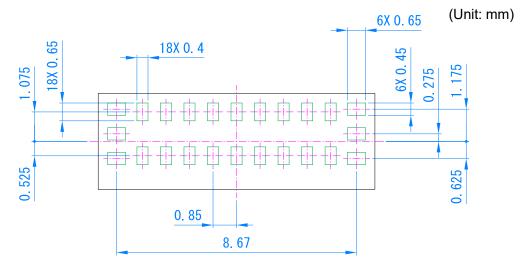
Recommended dimensions of the module footprint solder resist opening (Top view)
